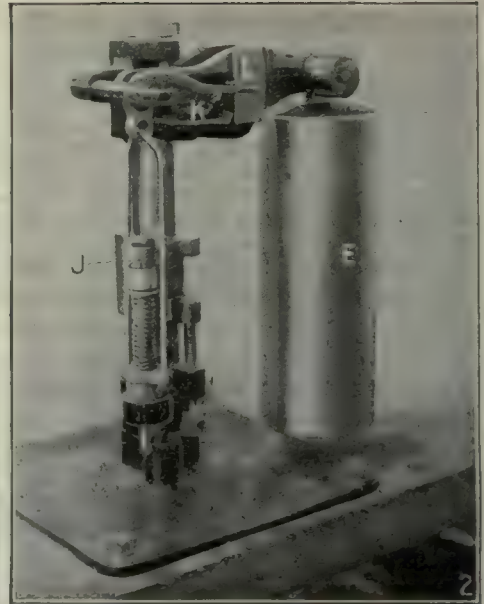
MACHINE WITH SPRING IN COMPRESSED CONDITION
